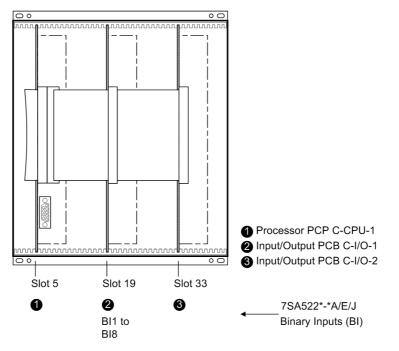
Front view with housing size ¹/₂ after removal of the front cover simplified and scaled down)
